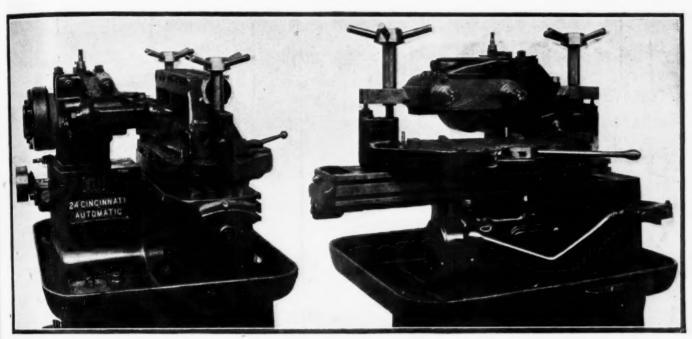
Left side of machine showing cylinder casting in place in fixture before being brought to the cutting plane
